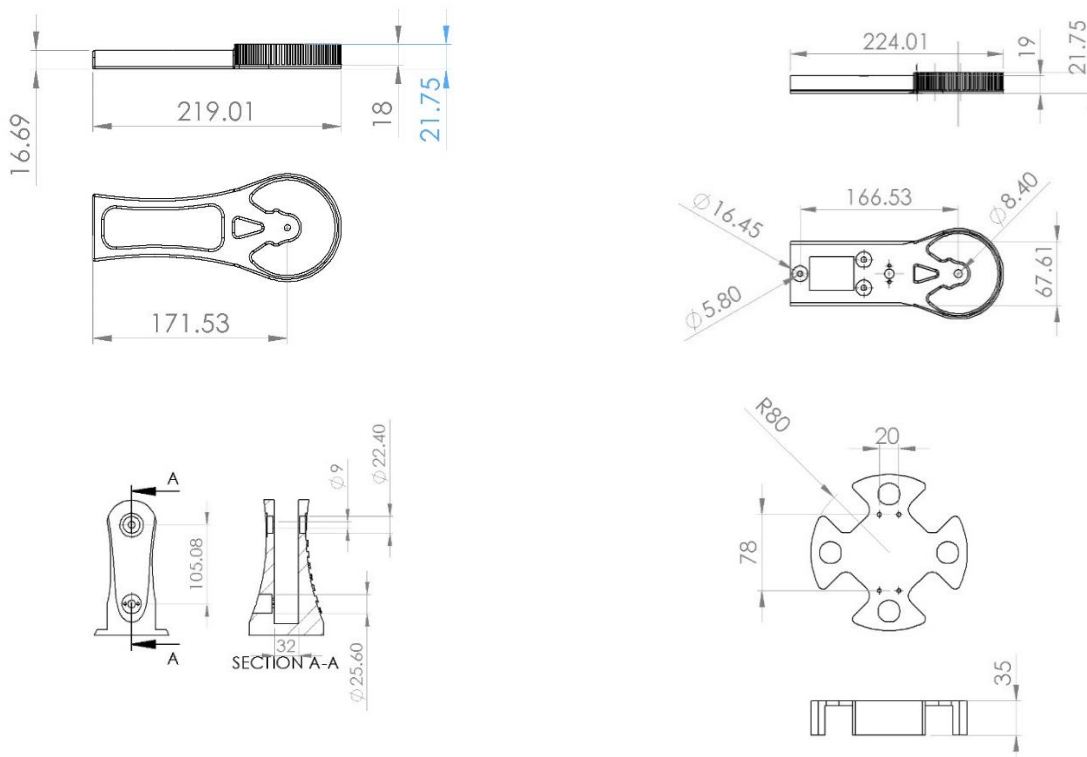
Drawings of the links of each robot (dimensions are in millimeters): a. Upper link b. Lower link c. Base link d. Base of the robot.
